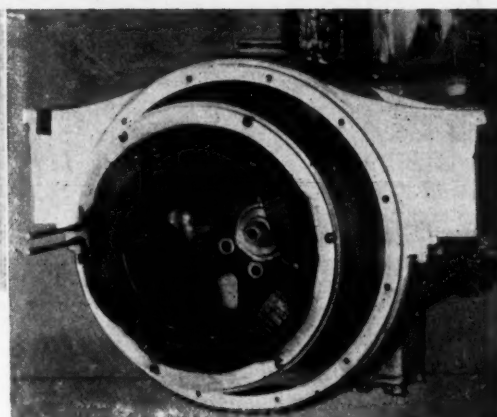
Left—Armatures of motor and generator attached to propeller shaft
